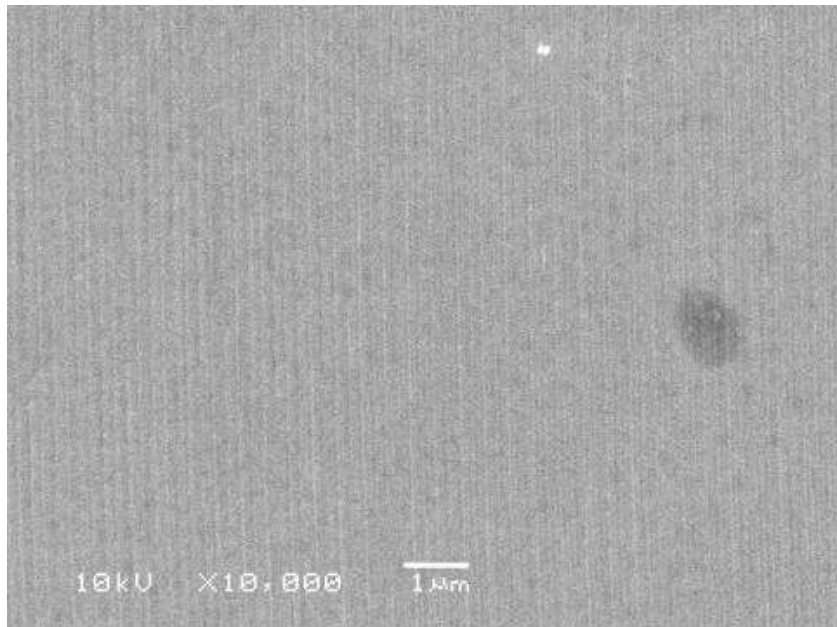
SEM image of finished surface using ultra precision cutting machine with linear motor slider
